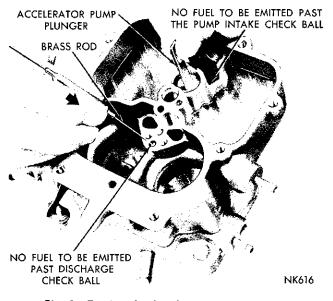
Testing the Accelerator Pump Intake and Discharge Check Balls
